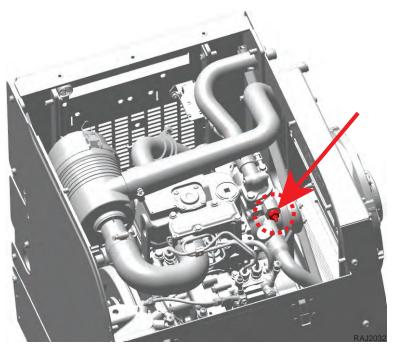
Coolant Bleed Valve Location On Water Pump Housing
